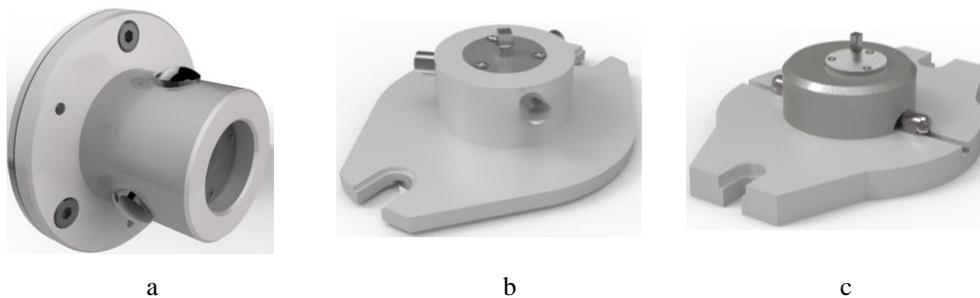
Adjustable locating module for locating of prismatic parts in “quadrantal angle”
